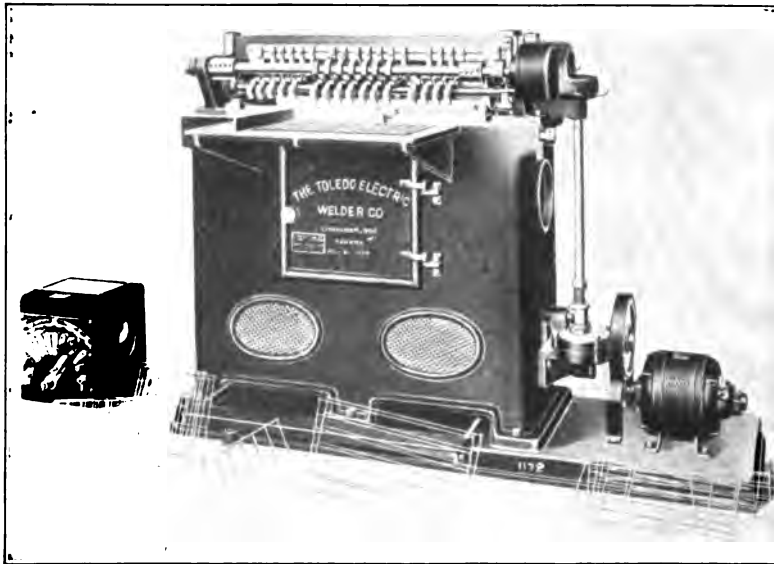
Electric Welder Capable of Welding Sixteen Wires at One Time
